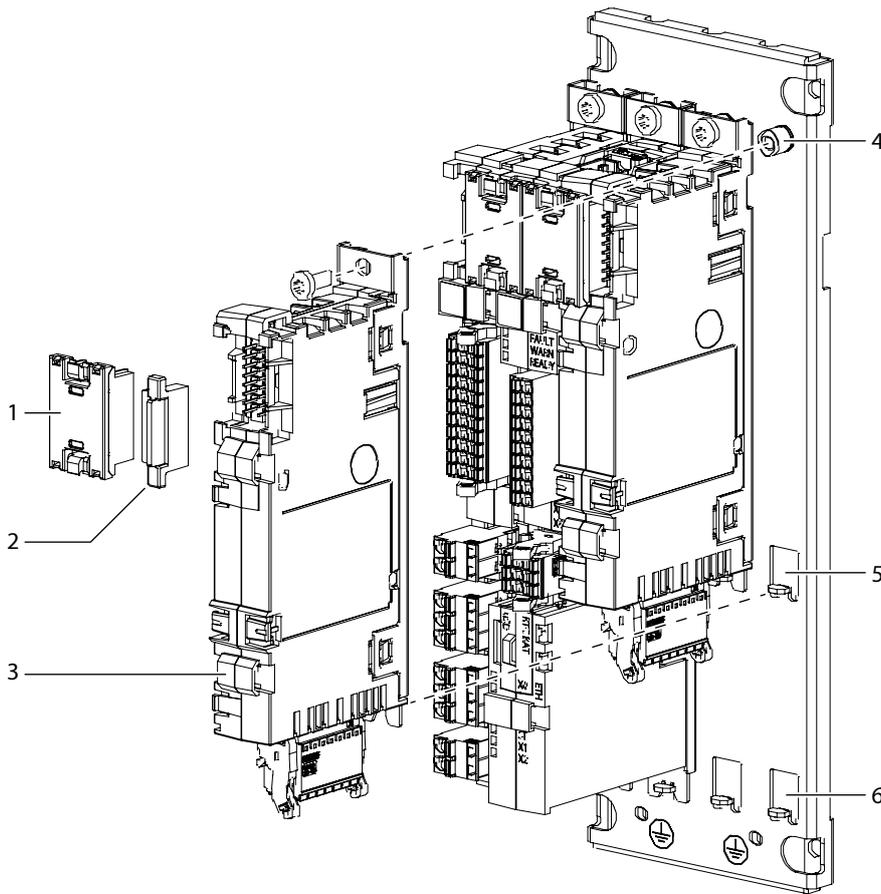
Installing a Board to the Modular Control Unit Mounting Plate
